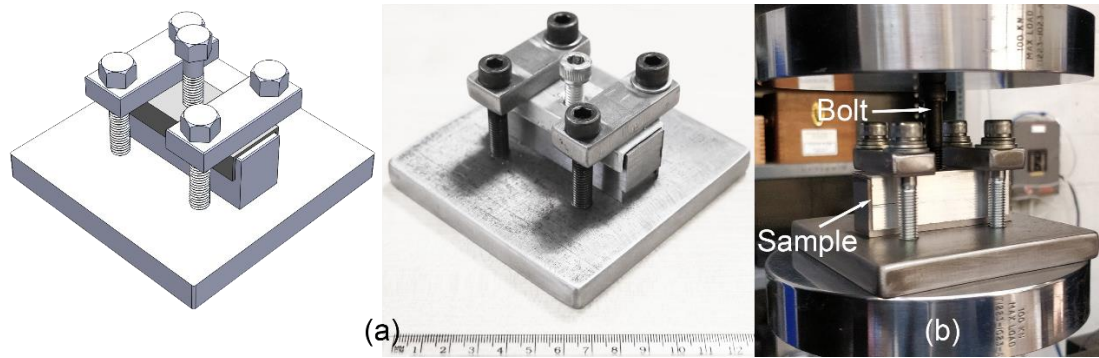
(a) Schematic (left) and actual images (right) of the work-holding fixture and (b) the fixture in position on the universal tester.
